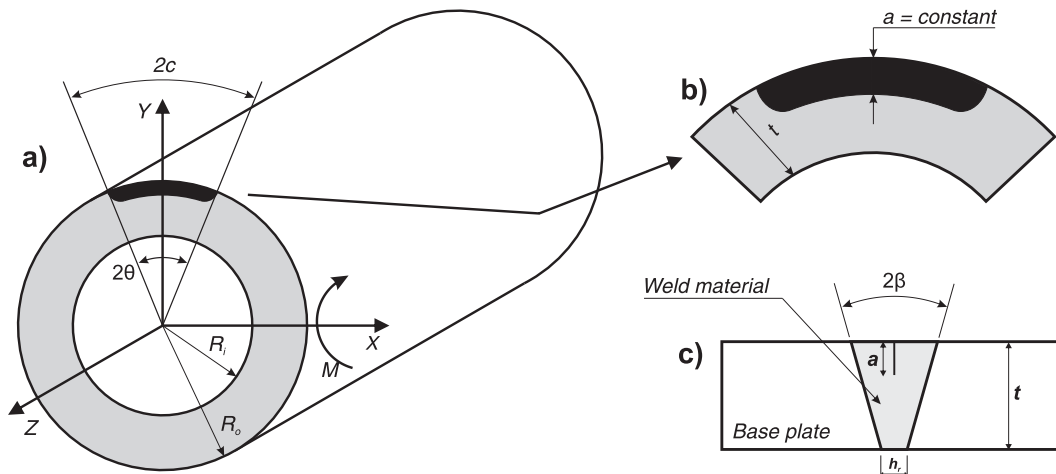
Schematic illustration of the pipe configuration: (a) pipe and crack geometry, (b) detail of the crack region and (c) weld groove geometry.
